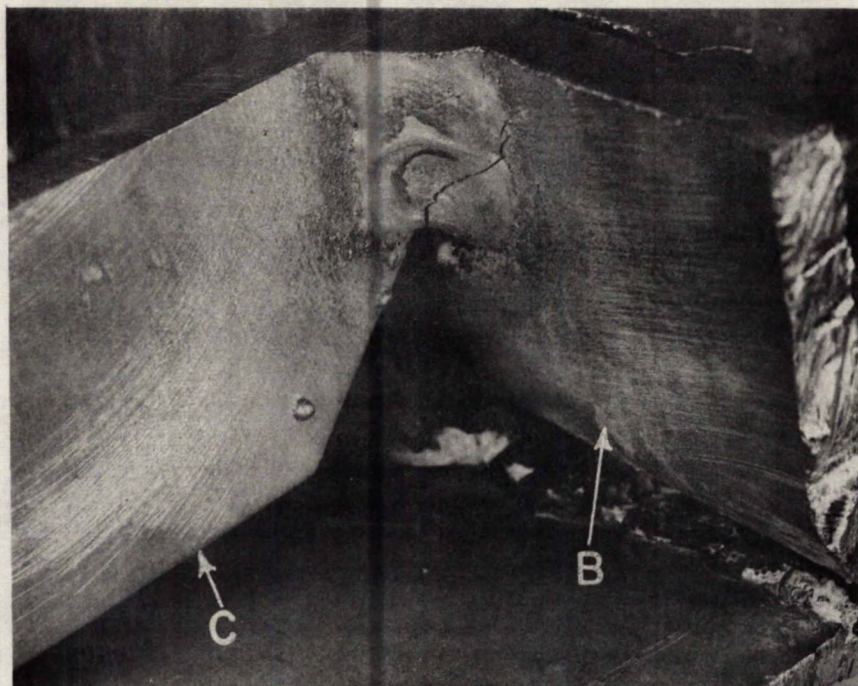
Showing crack in weld joining sump reinforcement to sump wall. C - sump reinforcement, B - sump wall. (X2).
